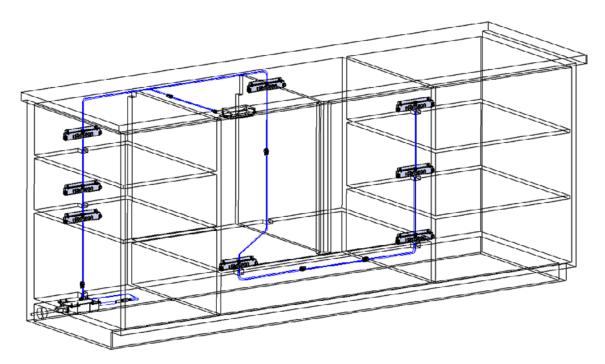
Complete cabinet assembly using both top link and bottom link cables (locks not displayed)
